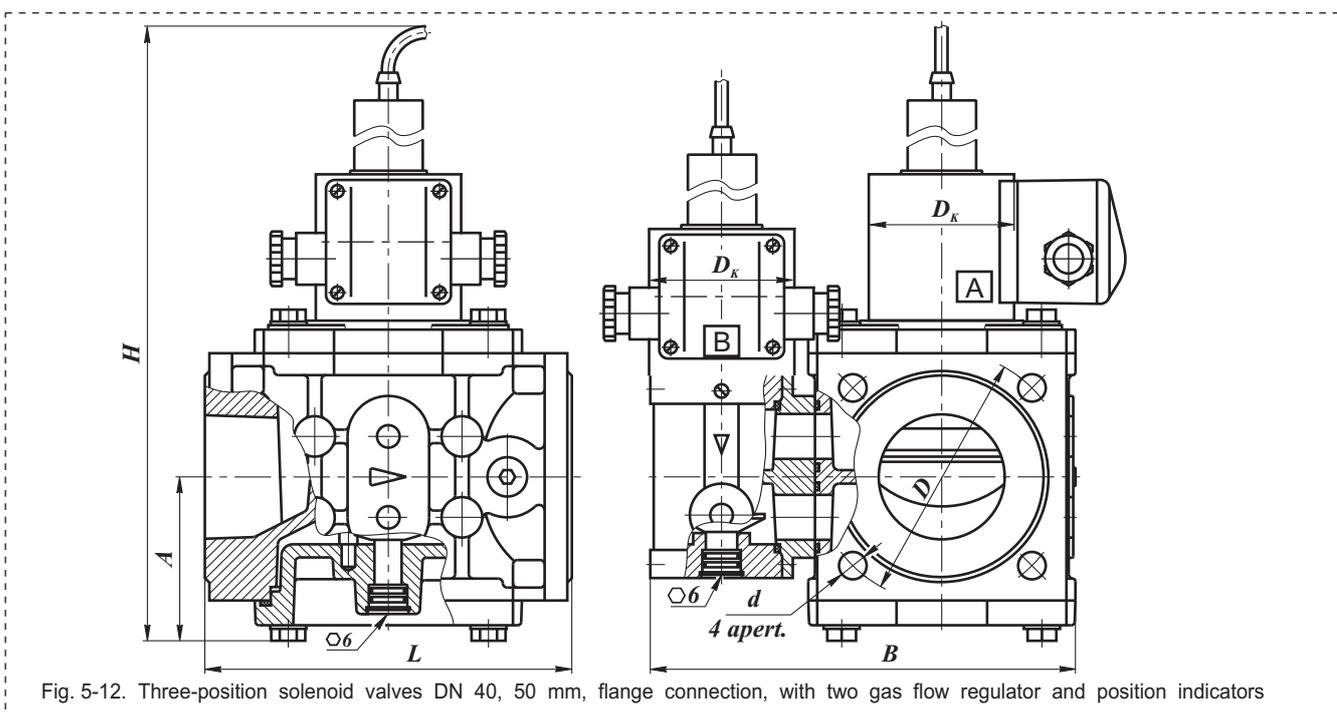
Three-position solenoid valves DN 40, 50 mm, flange connection, with two gas flow regulator and position indicators
